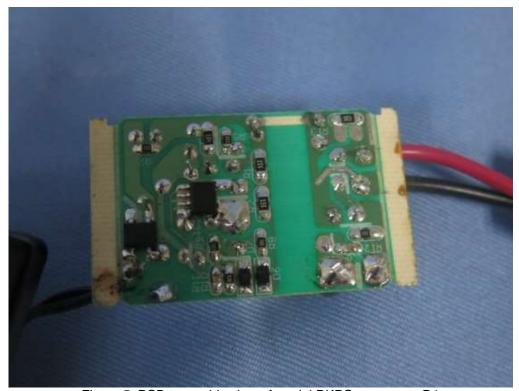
PCB trace side view of model RKPO-zzxxxyyyy-D1
